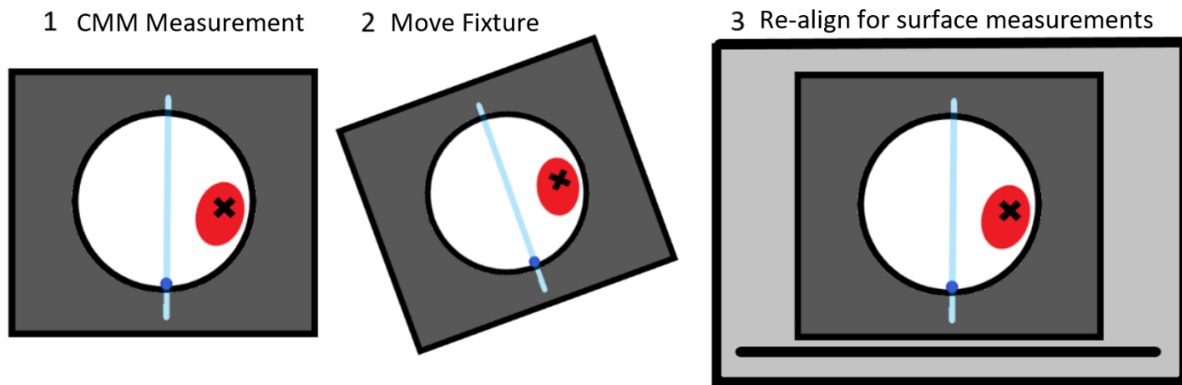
Using fixturing alignment to minimise the effect of rotational azimuth error. A top view of the alignment of a hip bearing component at 1: CMM Measurement, 2: Moving in between measurement machines, 3: Re-aligning for surface measurements.
